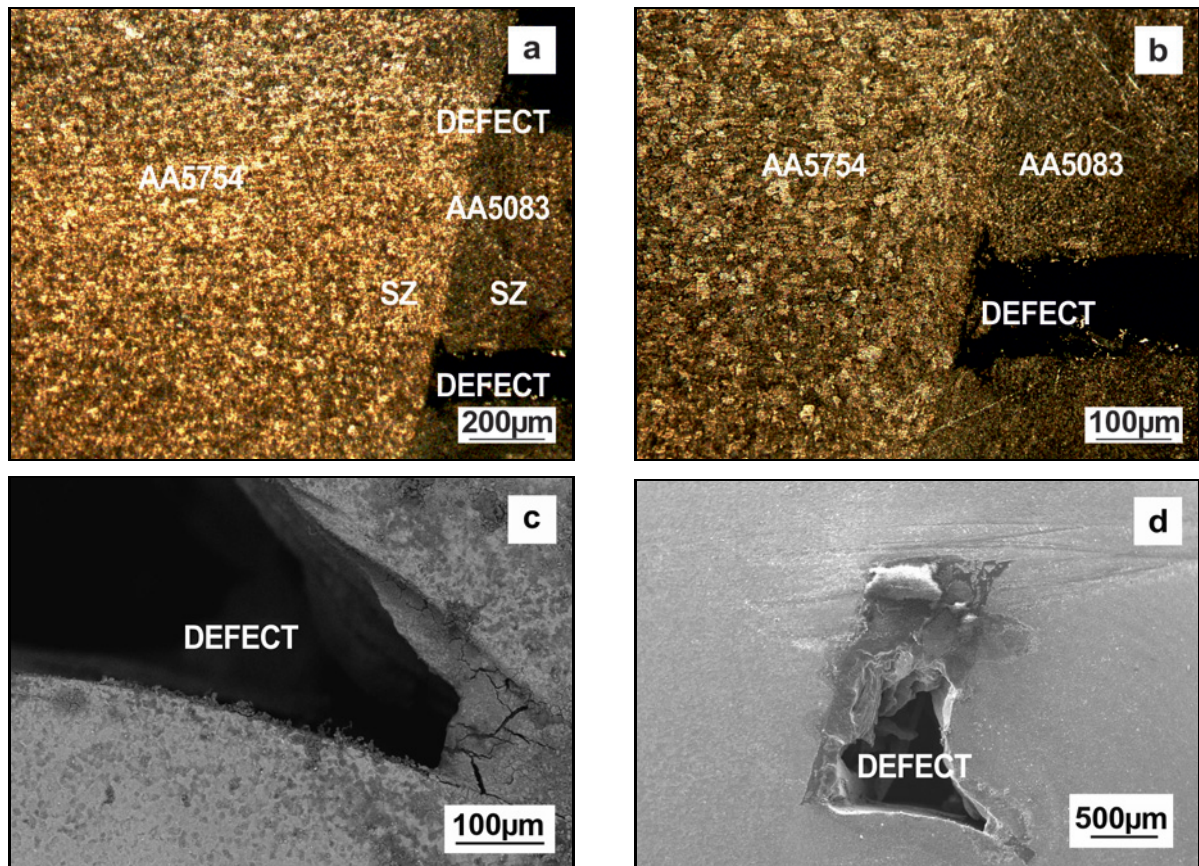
OM and SEM images of (a) the welding zone, (b) SZ and TMAZ regions, and (c) and (d) defects in the welding zone of specimen 8.
